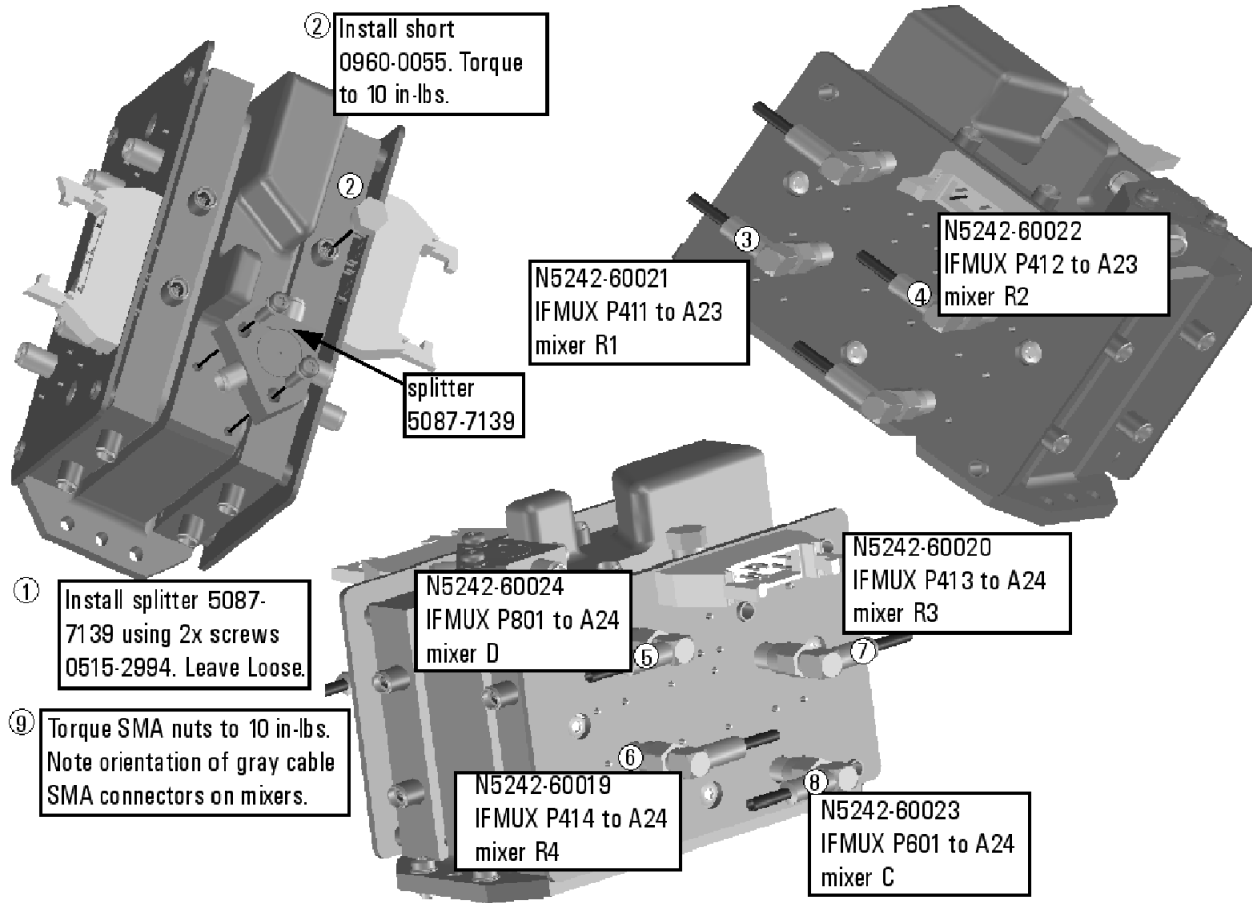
A24 Mixer Brick Assembly (0515-0372, 5087-7829)
